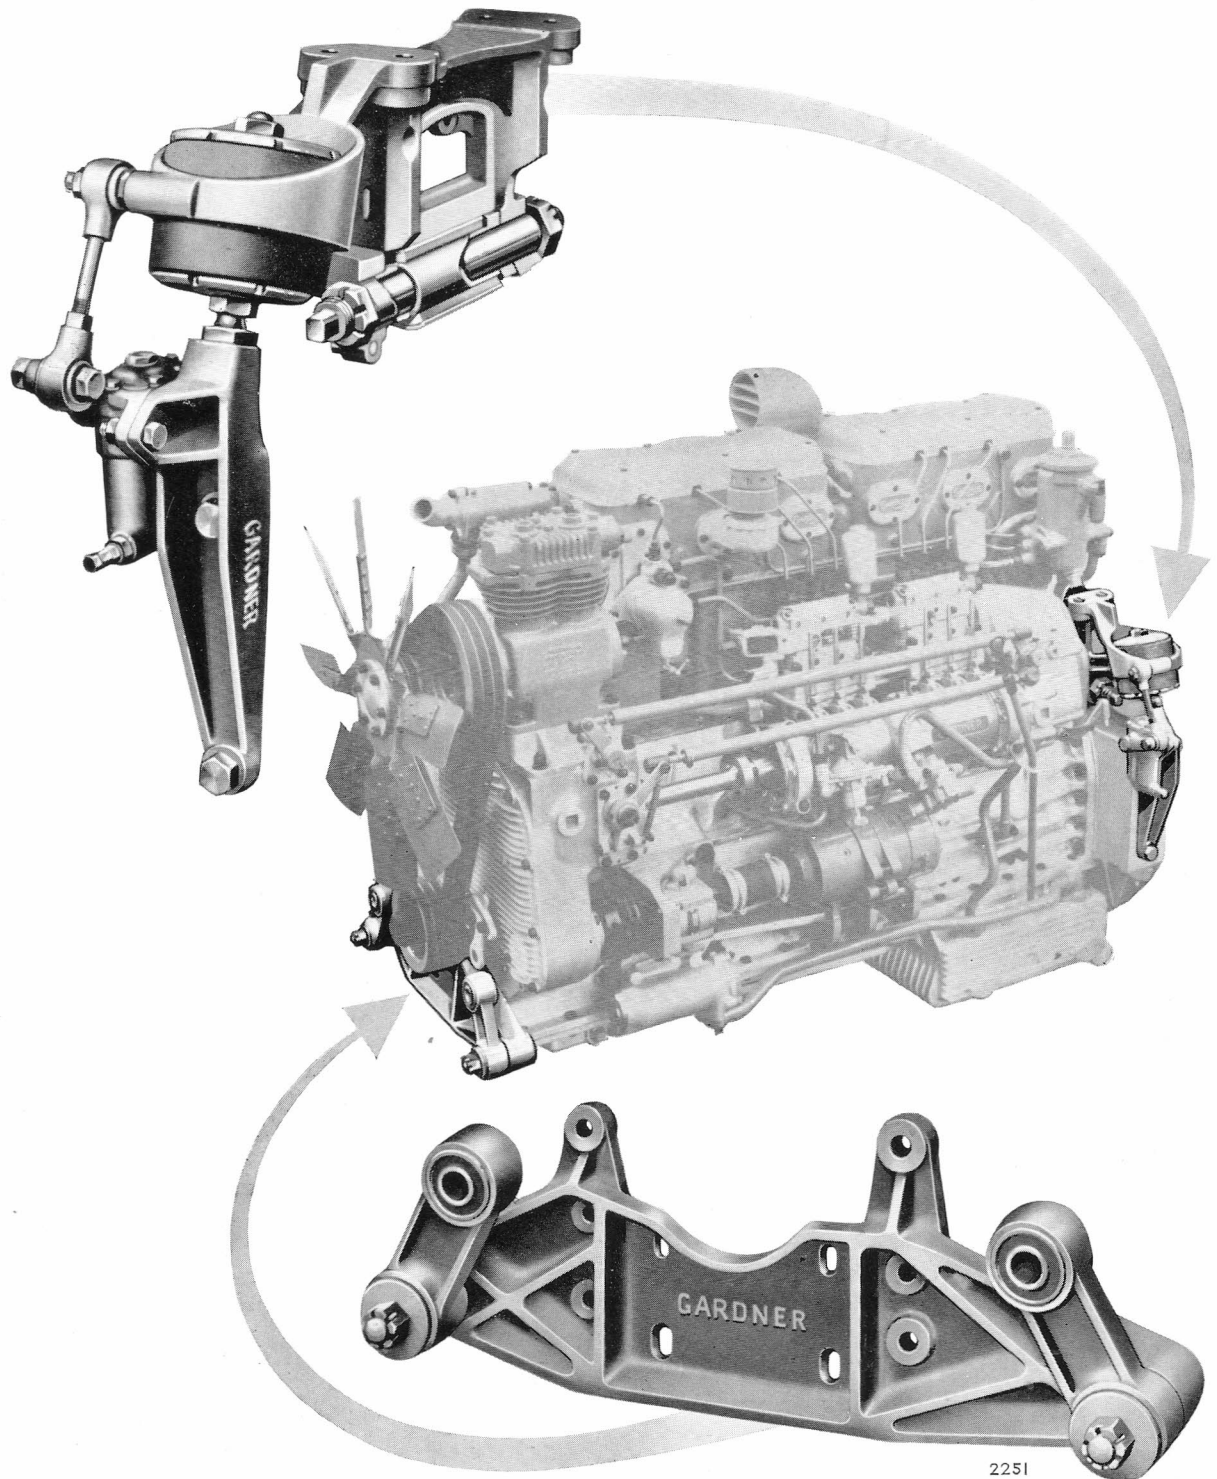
Gardner Flexible Engine Mounting and Torque Reaction Damper
